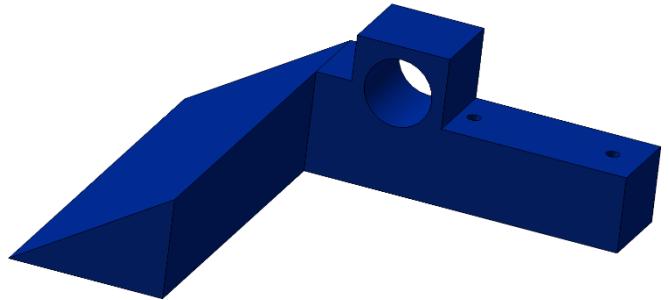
SolidWorks model of the finalized right-half idler roller mount part. The model for the left-half idler roller mount is a mirror image of this part.
